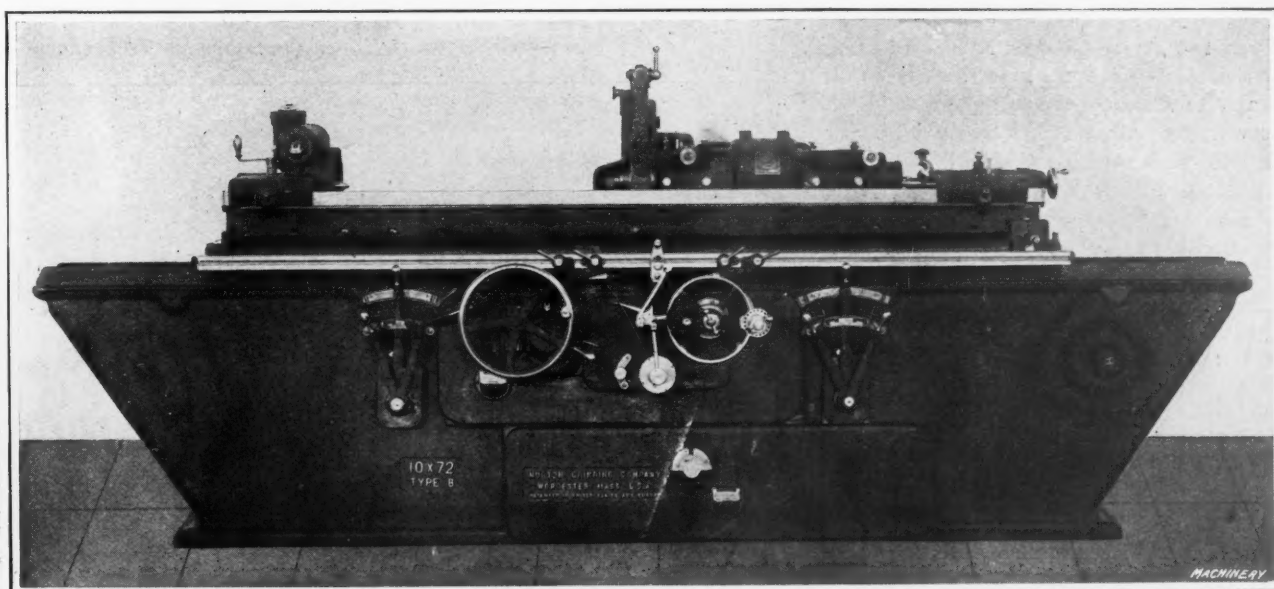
Self-contained Cylindrical Grinding Machine built by the Norton Co., Worcester, Mass.
